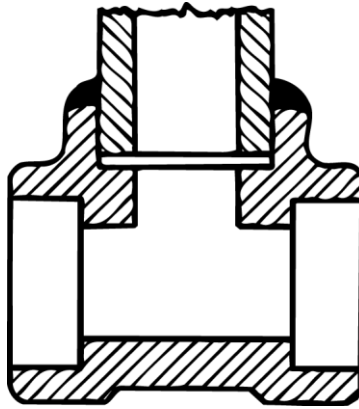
Cross Section of a Socket-welded Tee Connection
